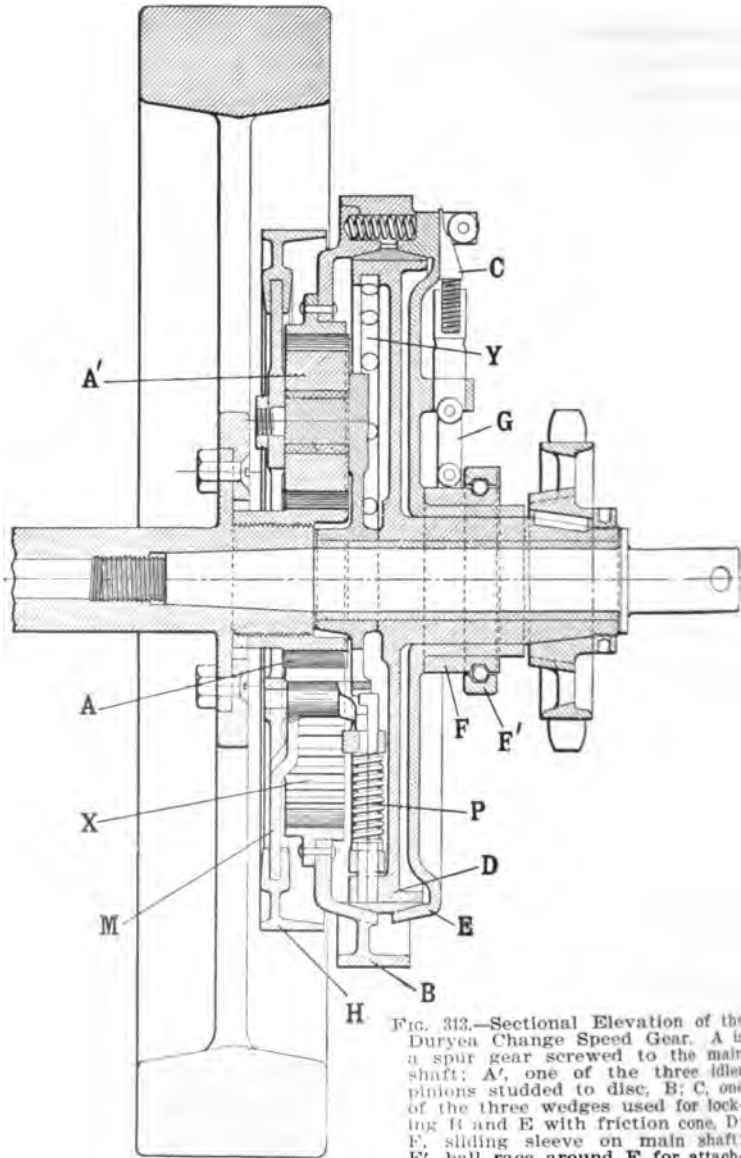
Sectional Elevation of the Duryea Change Speed Gear. A is a spur gear screwed to the main shaft; A', one of the three idler pinions studded to disc, B; C, one of the three wedges used for locking B and E with friction cone, D; E, sliding sleeve on main shaft; F', ball race around F for attaching the shifting lever; G, toggle joint operated by shifting sleeve, F; M, lever for raising or lowering pin, P; X, an internal gear on disc, B; Y, a groove containing perforations for admitting pins, P, when H and B are locked together.
